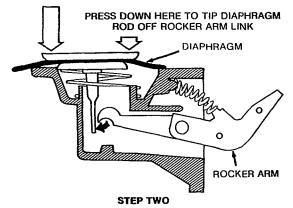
REMOVAL OF J-SERIES DIAPHRAGM ASSEMBLY
